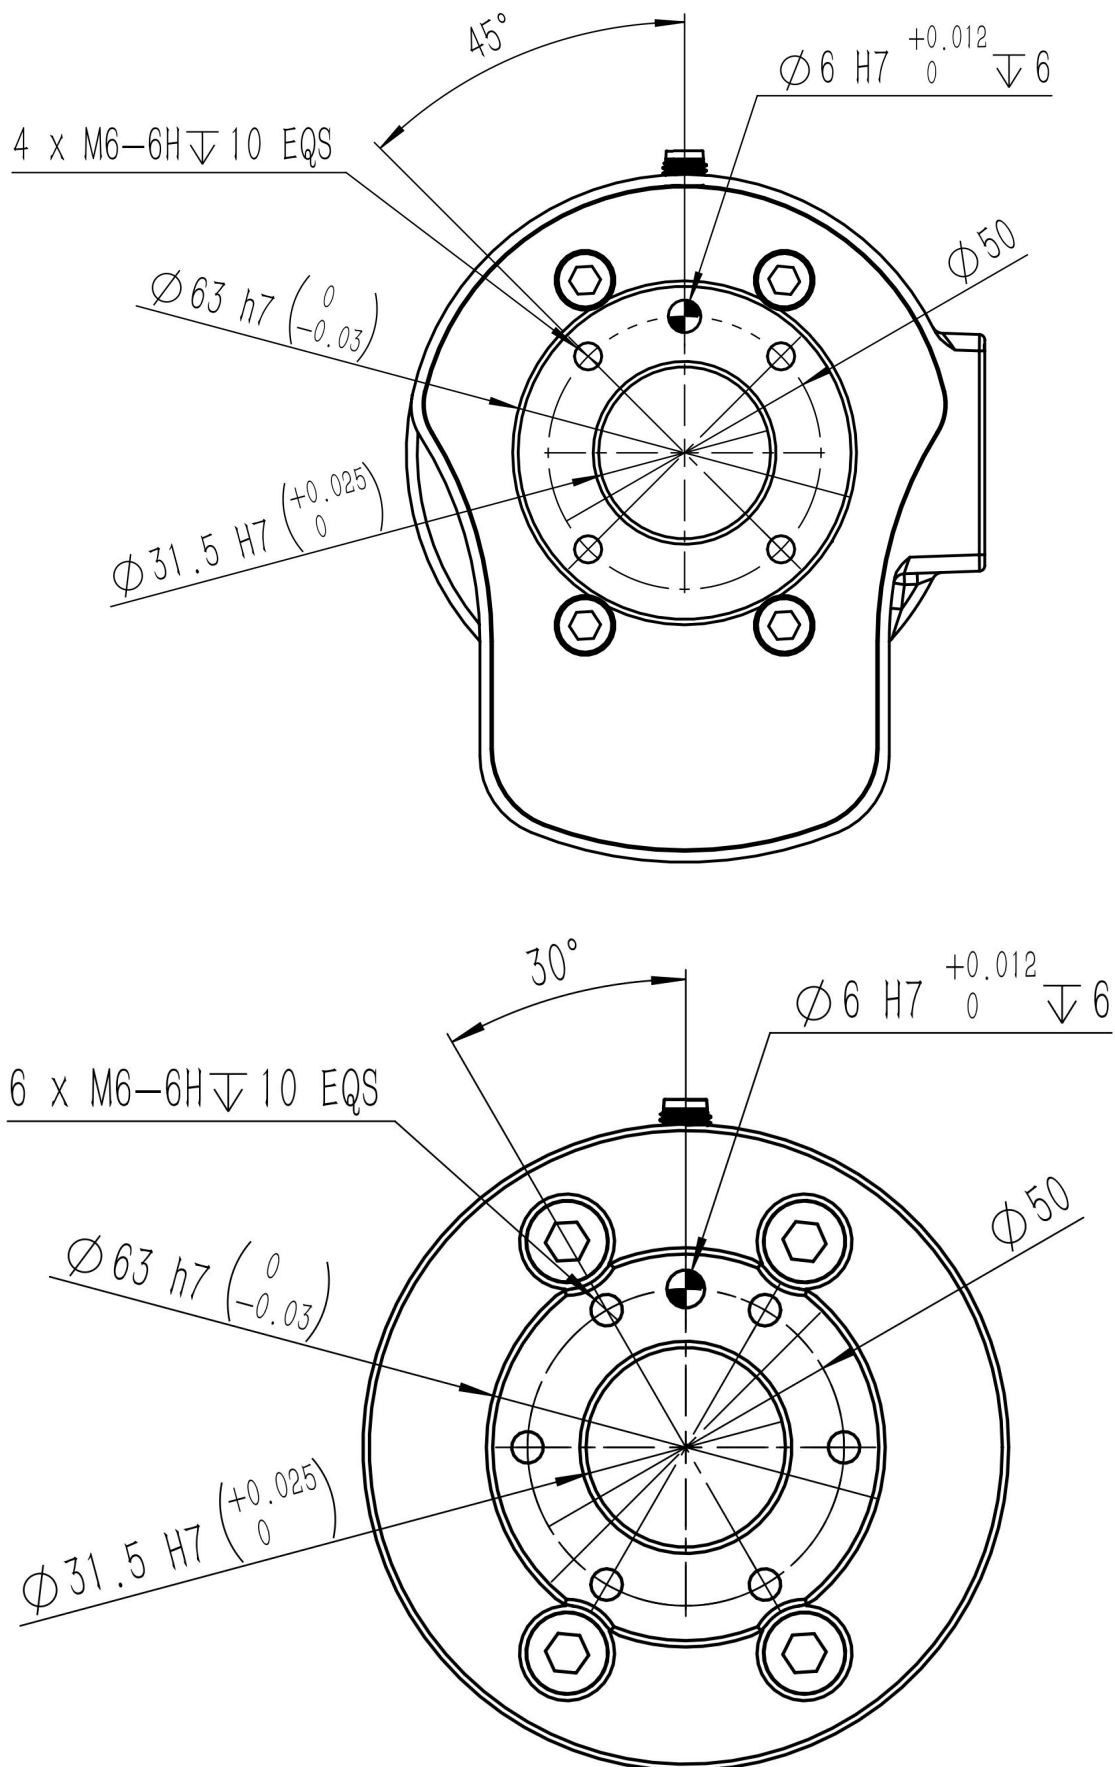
Mechanical Installation Interface of S20-180 Pro and Eco Flange
